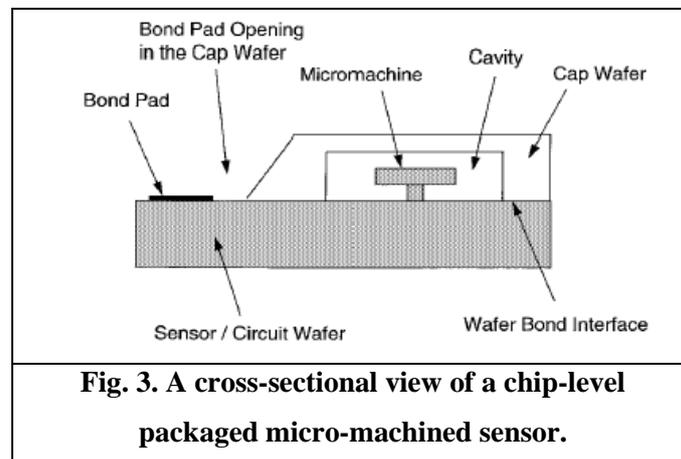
A cross-sectional view of a chip-level packaged micro-machined sensor.
